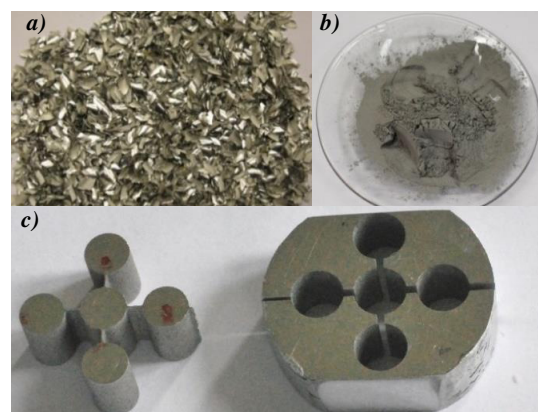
a) AA6061 machining chips, b) AA6061 atomized powder, c) SPS disc and compression test specimens.
